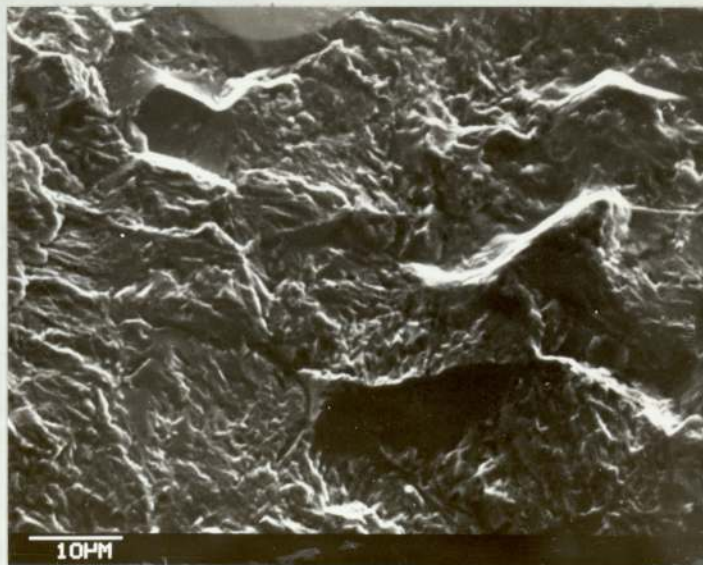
Fatigue fracture of carbonitrided case at the notch root, case depth 0.76 mm, root radius 0.76 mm,  $N_i = 173,780$
